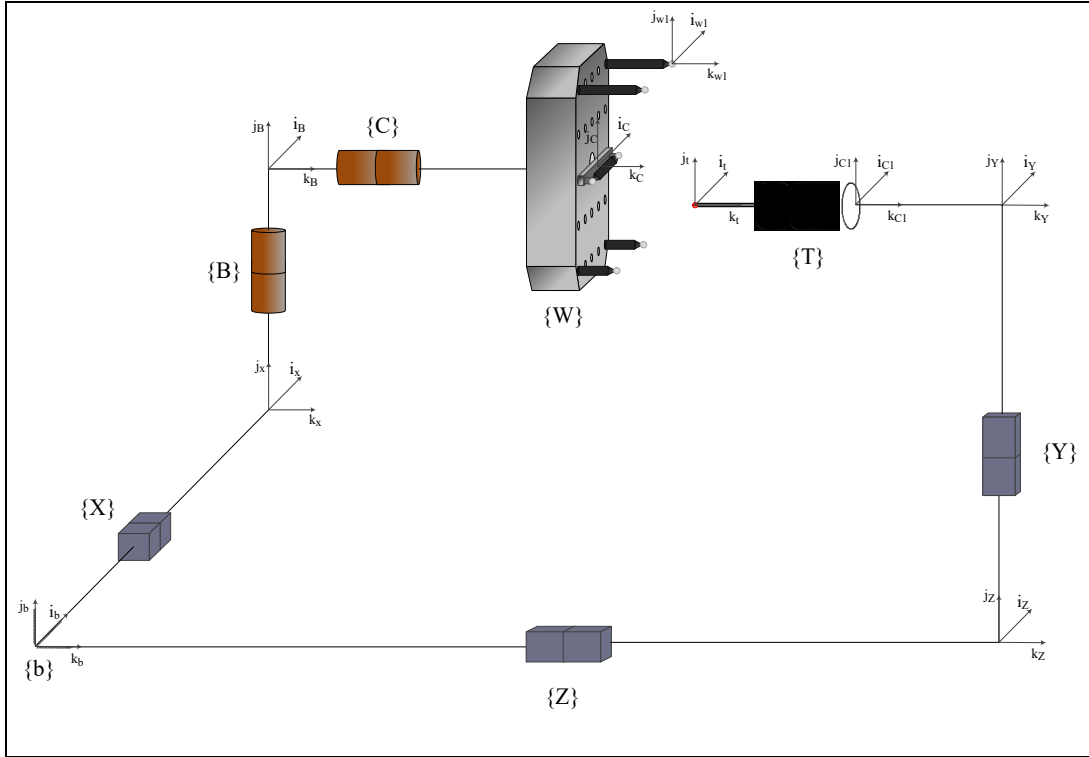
Nominal kinematic model of a $wCBXbZY(C1)t$ five-axis machine tool
